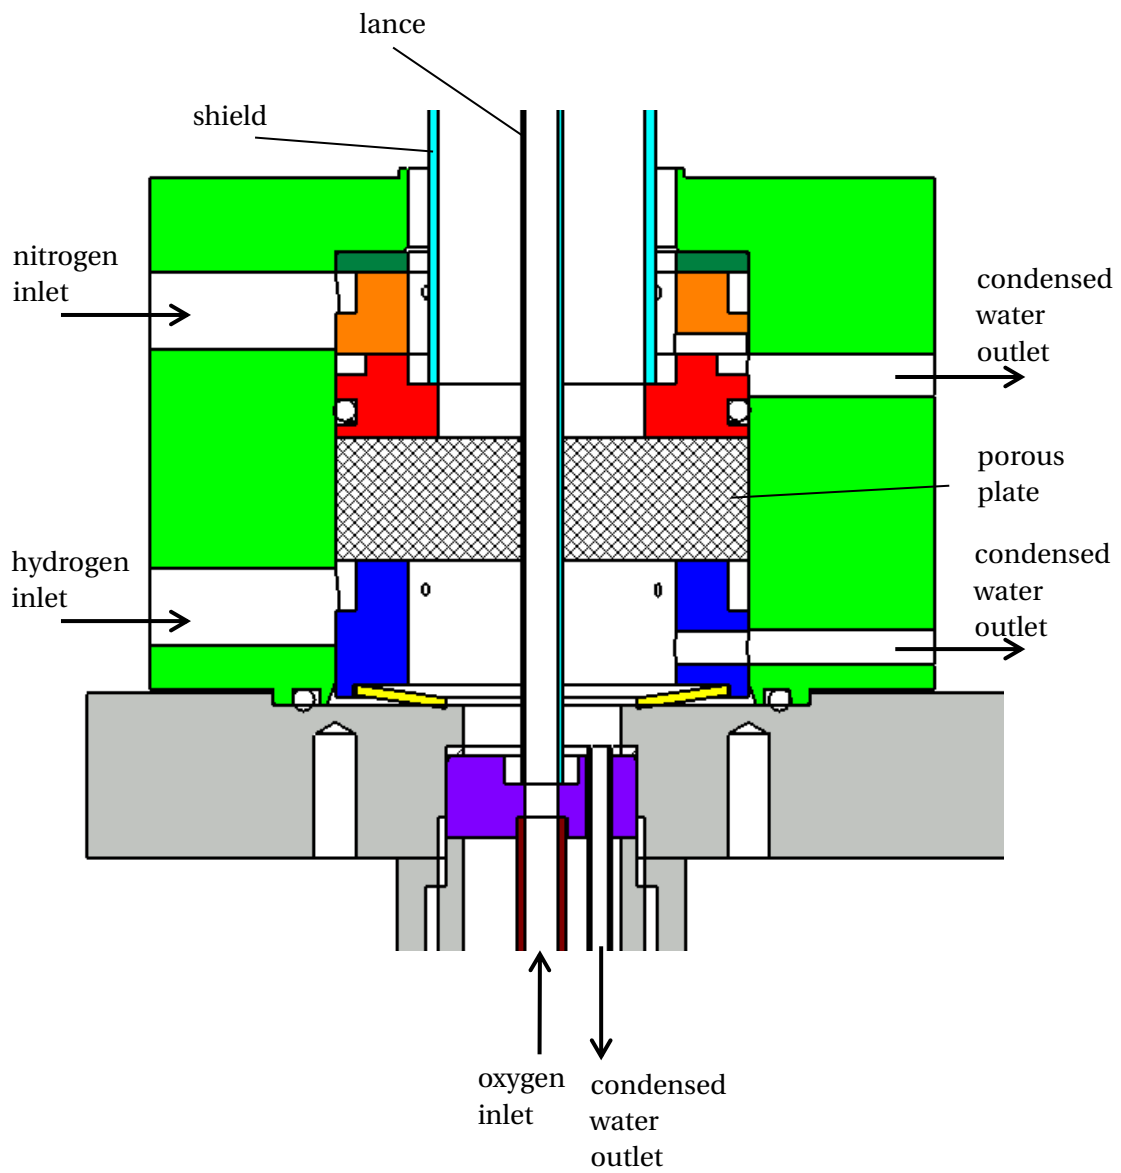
Cut through the base part of the high-pressure burner. Figure from [87].
